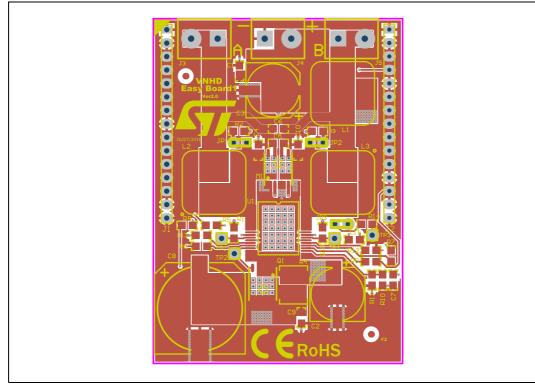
PCB top layout with VNHD7008AY with positioning of ESD & filter capacitor
